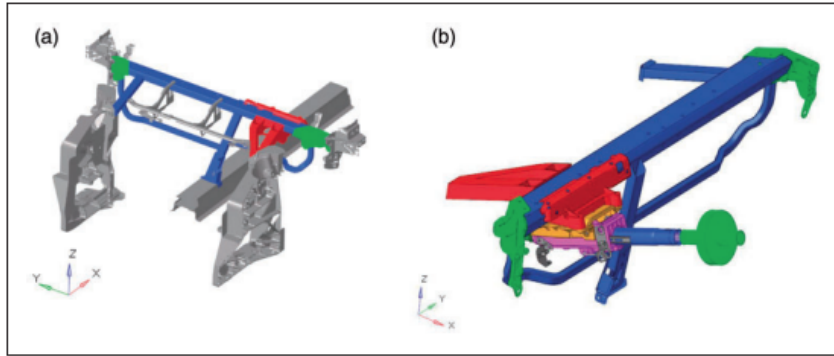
(a) Global view of the front area and (b) detailed view of the model including section of the steering assembly [83].
